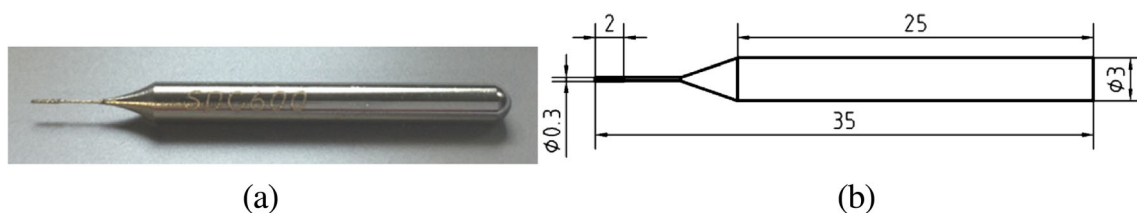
Micro-grinding tool (a) and its dimensions (b)
